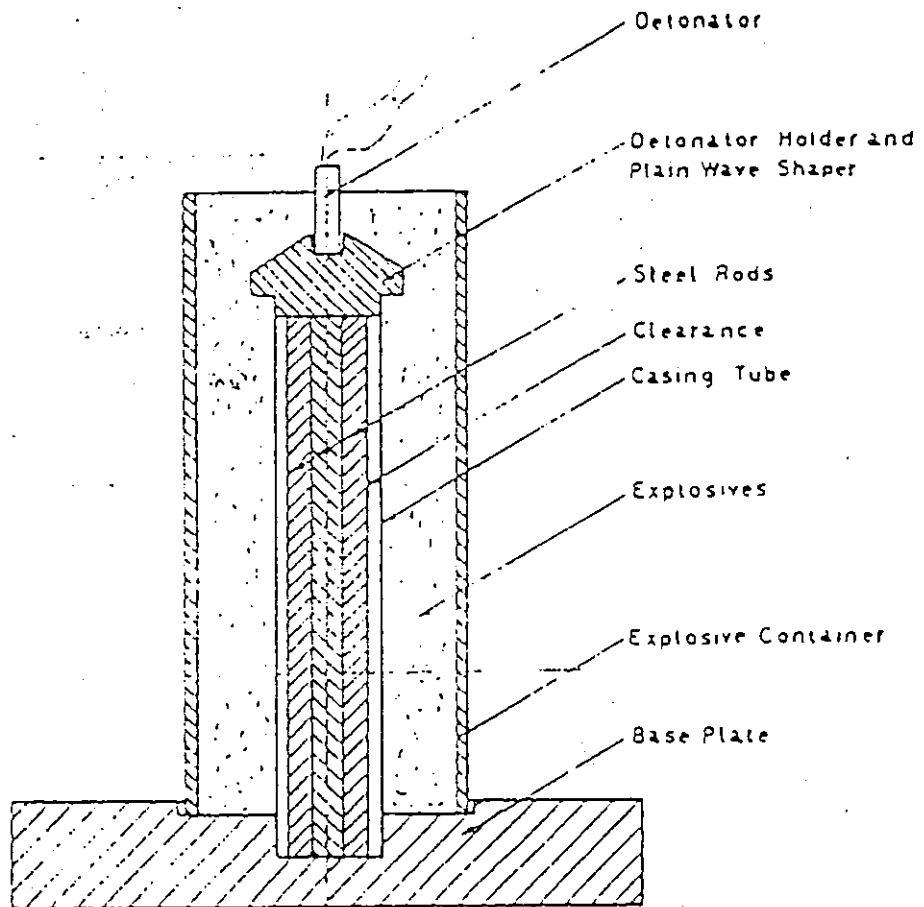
Implosive welding assembly of array of rods after Ref.[1]
